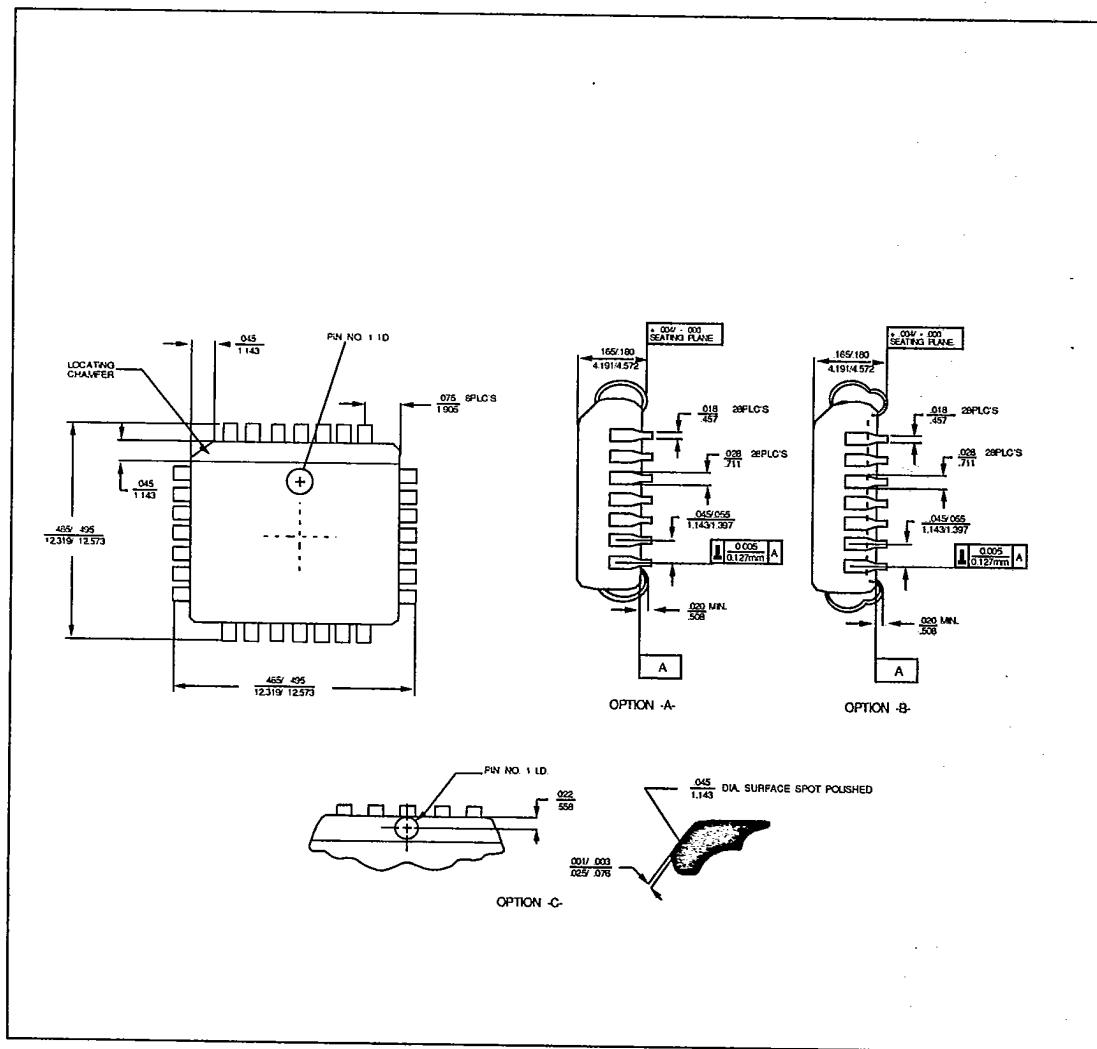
WD83C805 28-PIN PLCC PACKAGE DIMENSIONS
